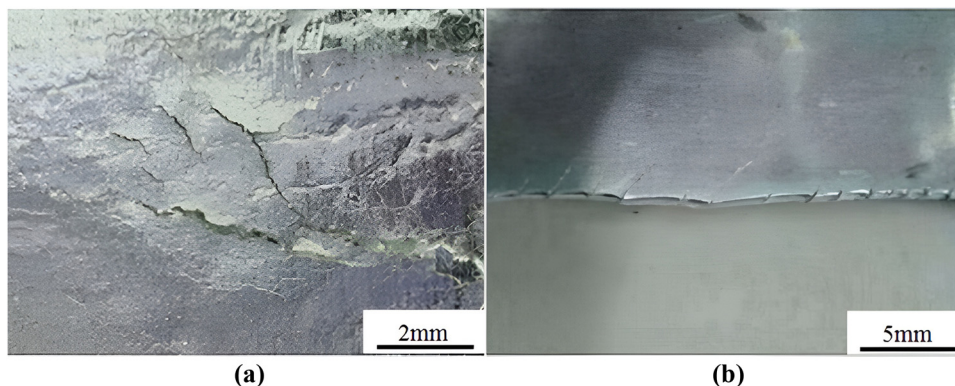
The crack of cast-rolling strip: (a) Surface oblique cracks and (b) edge cracks.
